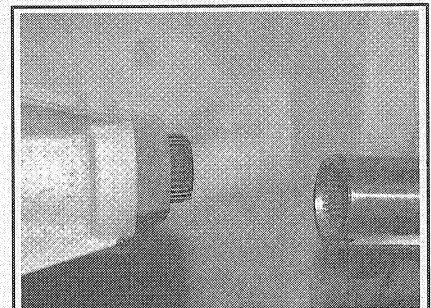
disengage the driveshaft from the transmission output shaft
